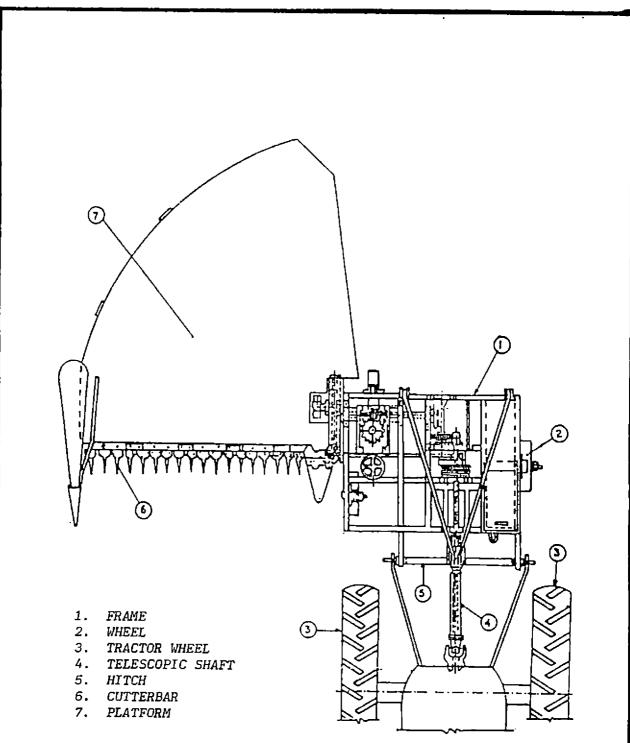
TRACTOR REAR MOUNTED SELF RAKING TYPE REAPER
